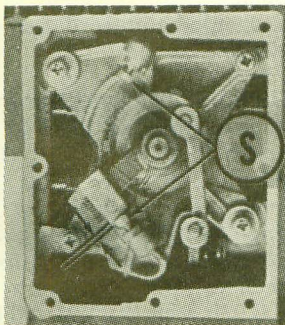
Gear change stop bolts (S) should have approximately 1MM clearance when stop ball engages detent in shifter cam.
